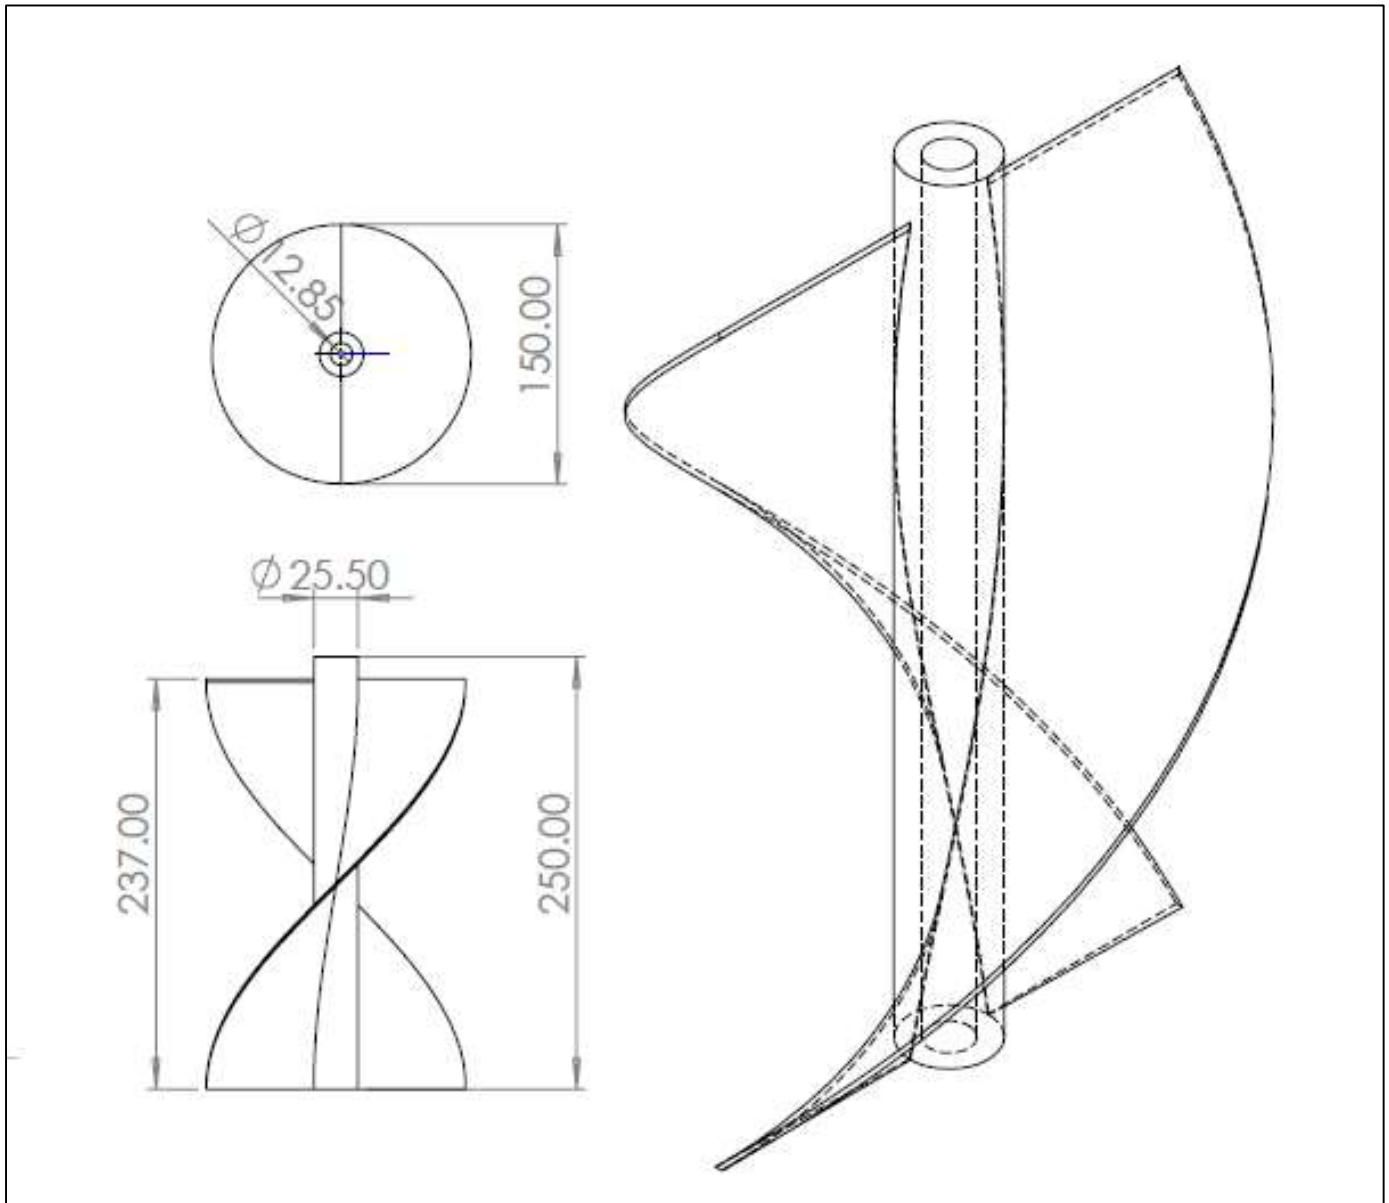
Half of the 2 blades turbine rotor, 3D printed twice for assembly
